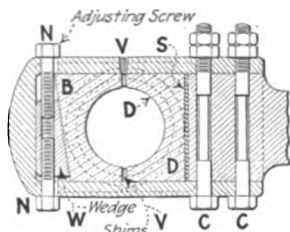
Crank-pin bearing with wedge and shims for adjustment.
